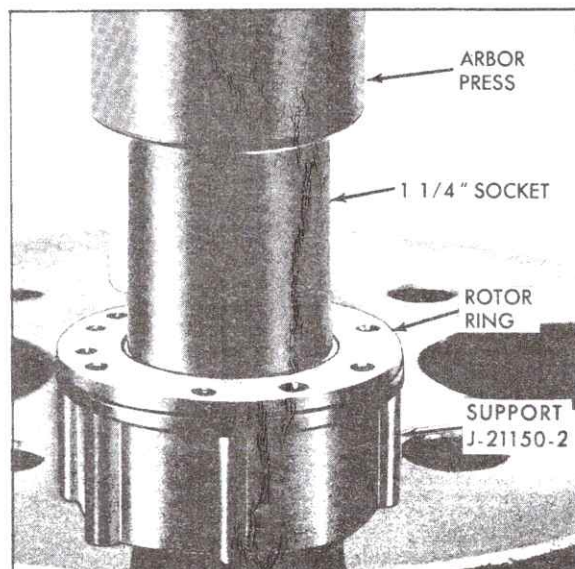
Removing Rear Bearing from Rotor Ring
